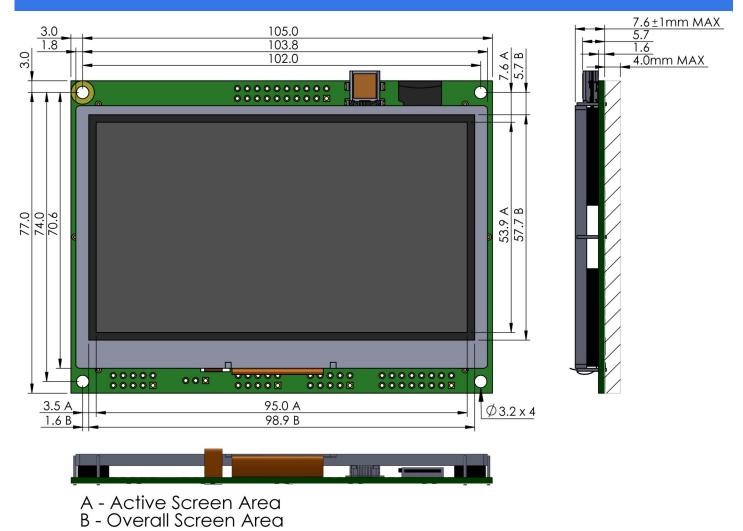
TU480x272C-K61XA1NU Mechanical drawing. Reference dimensions only.
